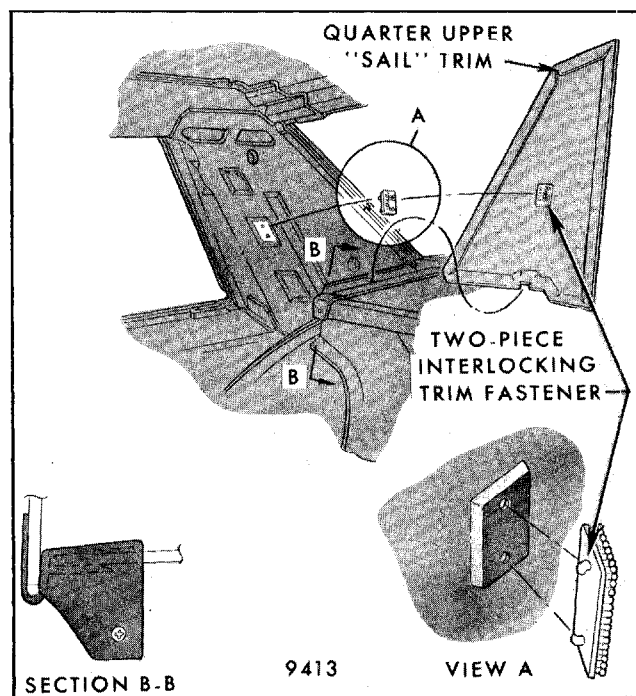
Quarter Sail Trim Attachment - "B,C" Coupe Styles
